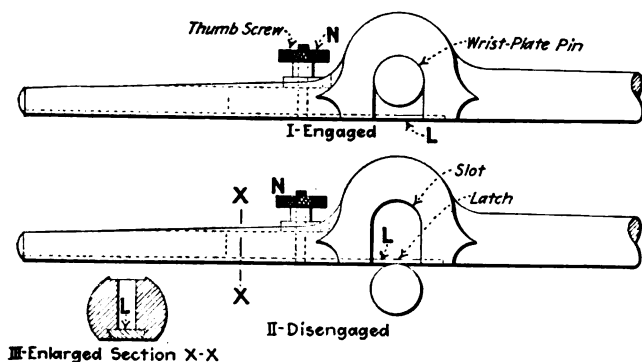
Hook-rod or reach-rod of Corliss engine showing latch for engaging wrist-plate pin. (To permit wrist pin to enter or leave slot, unscrew *N* until it leaves its seat, then pushing *N* to the left will also slide the latch, *L*, to the left and open the slot.)
